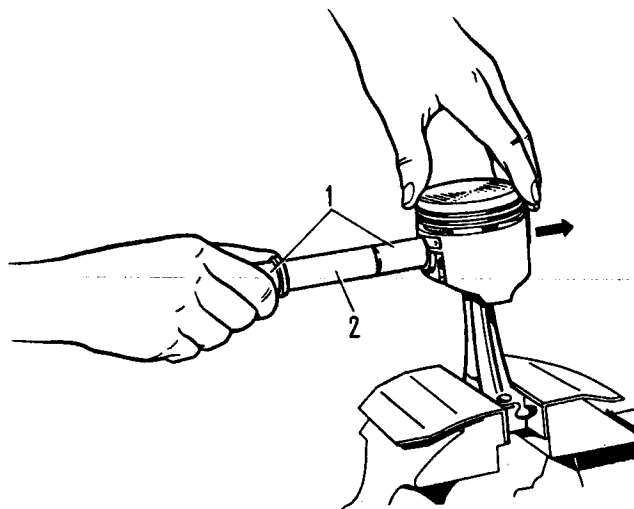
Press-Fitting Piston Pin into Connecting Rod Small End:
